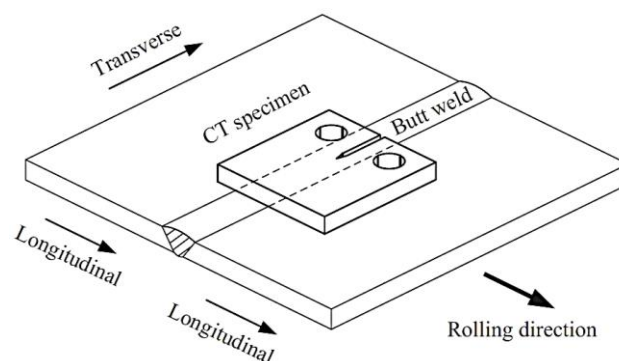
Sampling of CT specimens of butt weld [19].
